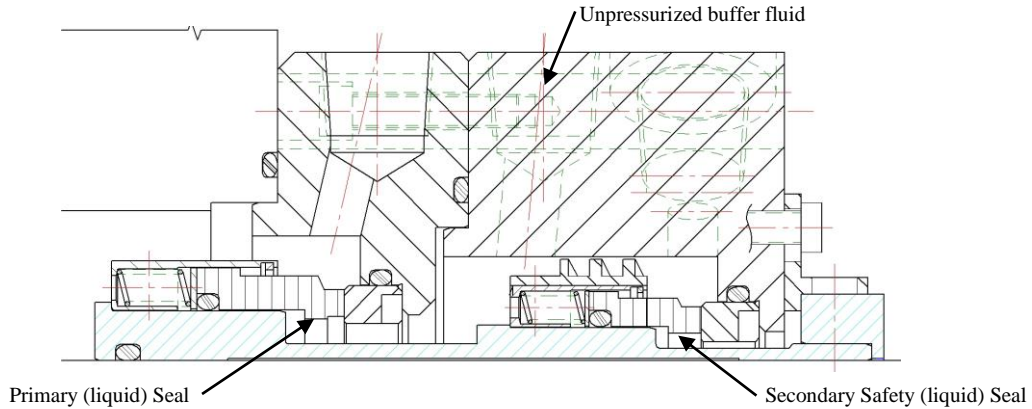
Typical dual unpressurized pusher seal arrangement using a liquid safety containment seal outboard
